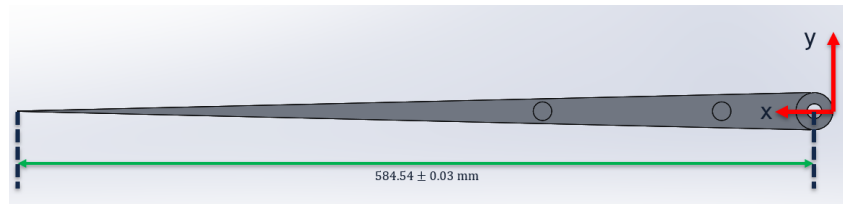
Trailing Edge CAD for 3.65-meter Test Section
